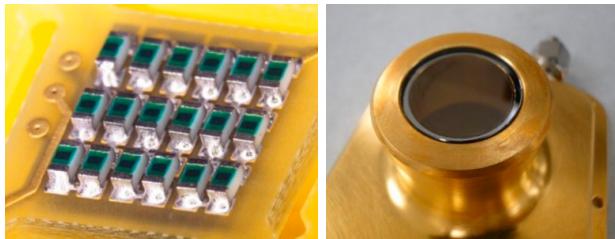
Soldering examples. Left, rows of 0402 chip resistors soldered onto FR4 board with 63Sn/37Pb solder paste, which melts at 183°C, and reflowed at peak temperature of ~220°C. Right, a glass window soldered onto a gold-plated aluminum housing using an In/Pb/Ag solder ribbon to form a vacuum seal.
